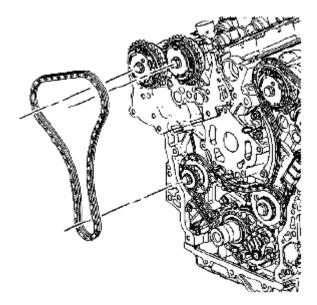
Identifying Right Bank Secondary Camshaft Drive Chain Courtesy of SUZUKI OF AMERICA CORP.
